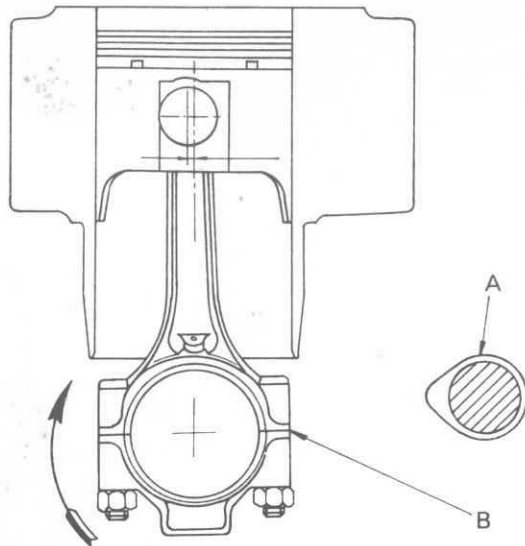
21 Correct assembly of connecting rod and piston. Note how piston pin is offset away from camshaft A, and cylinder numbering stamped on big-end at B faces the camshaft. The arrow shows the direction of engine rotation
